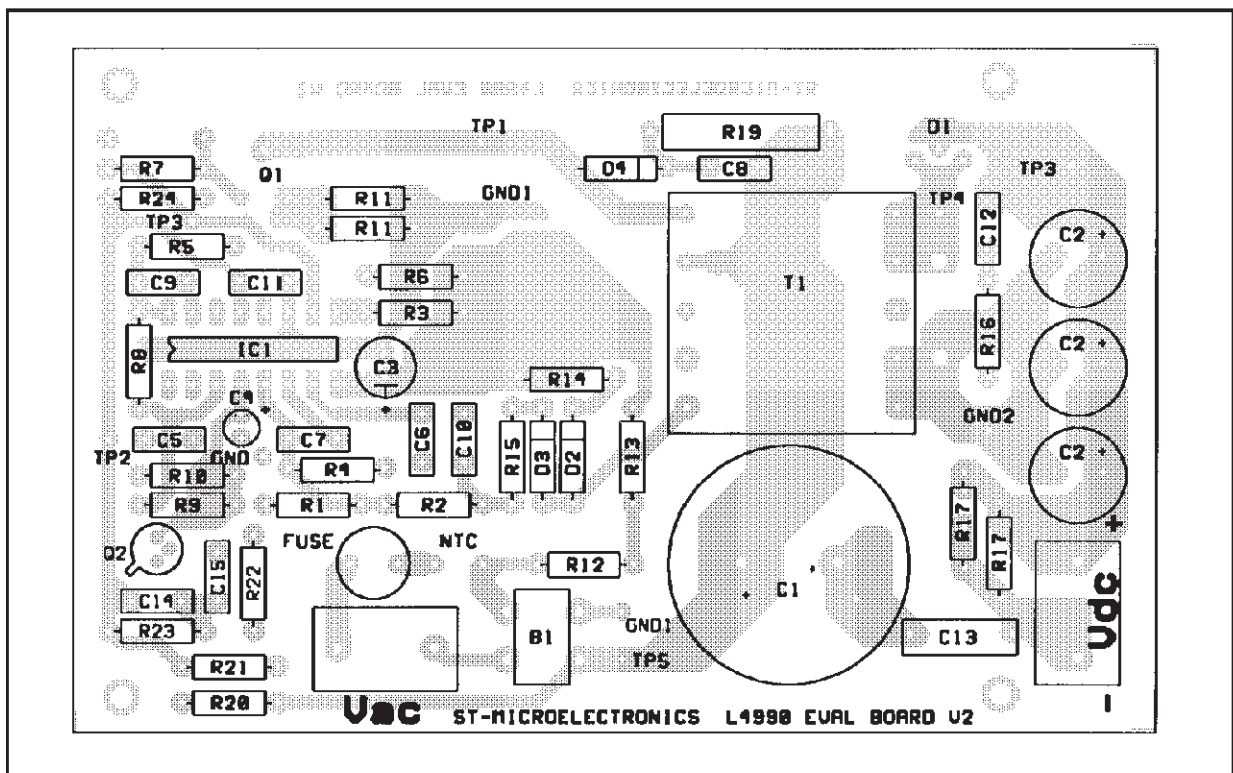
AC-DC adaptor PCB layout (1.25 :1 scale) - Back Side.
